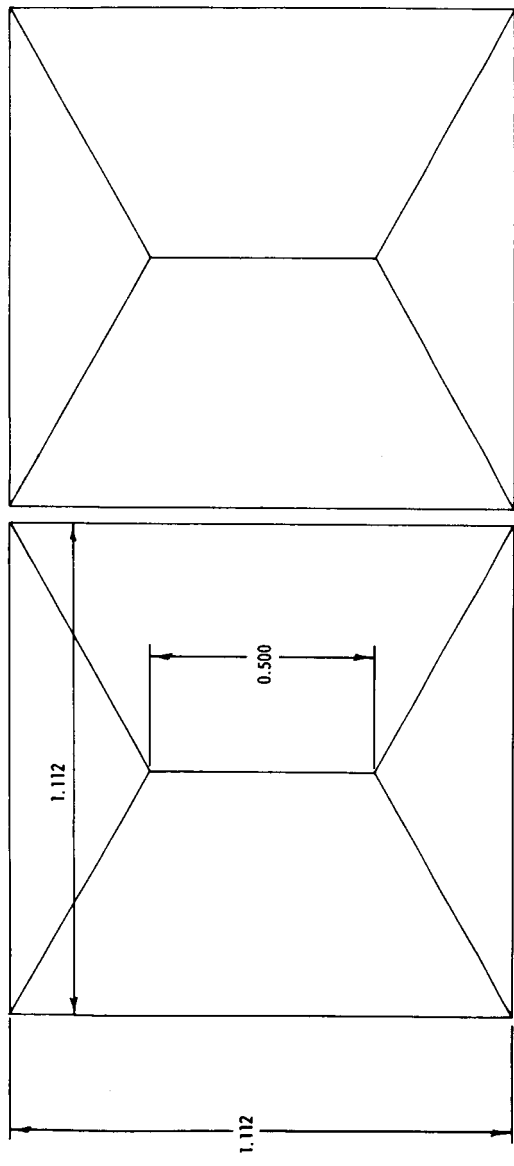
REFERENCE DESIGN — THERMOCOUPLE ASSEMBLY
